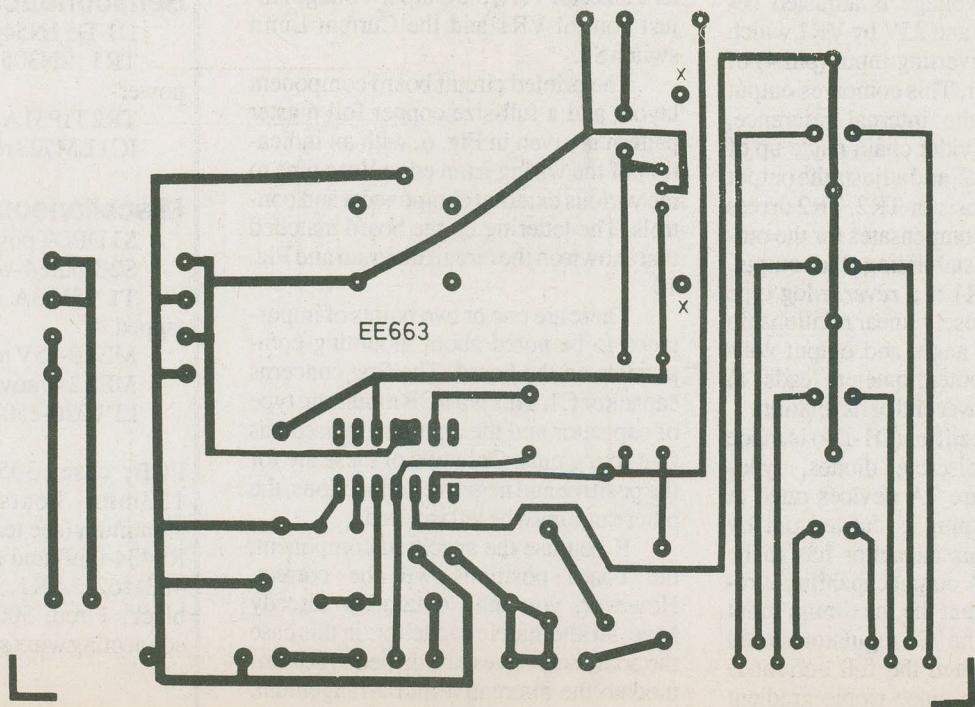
The printed circuit and parts overlay for the 25V/2A supply.
